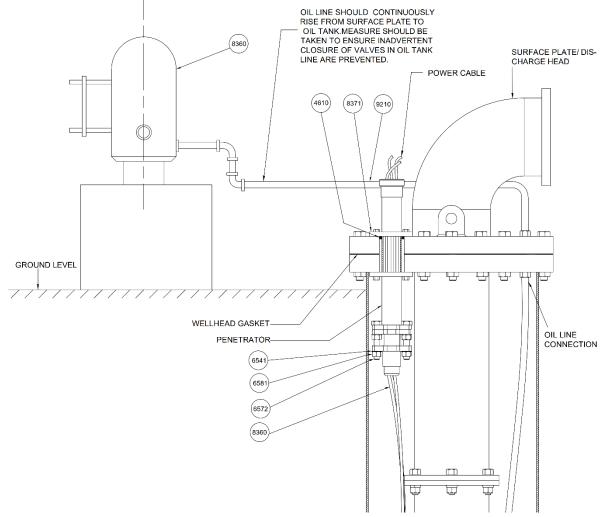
Penetrator, Oil Line, Oil Tank, Surface Plate Arrangement
